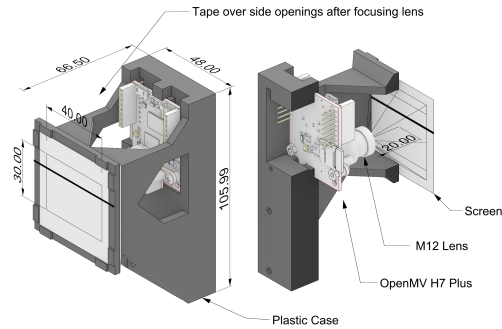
Dimensioned drawing (left) and cut-away (right) of the sensor hardware
